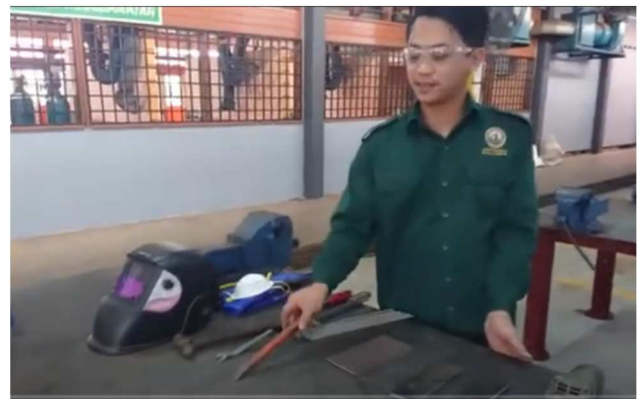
An instructor sharing the tools and preparation for welding.
